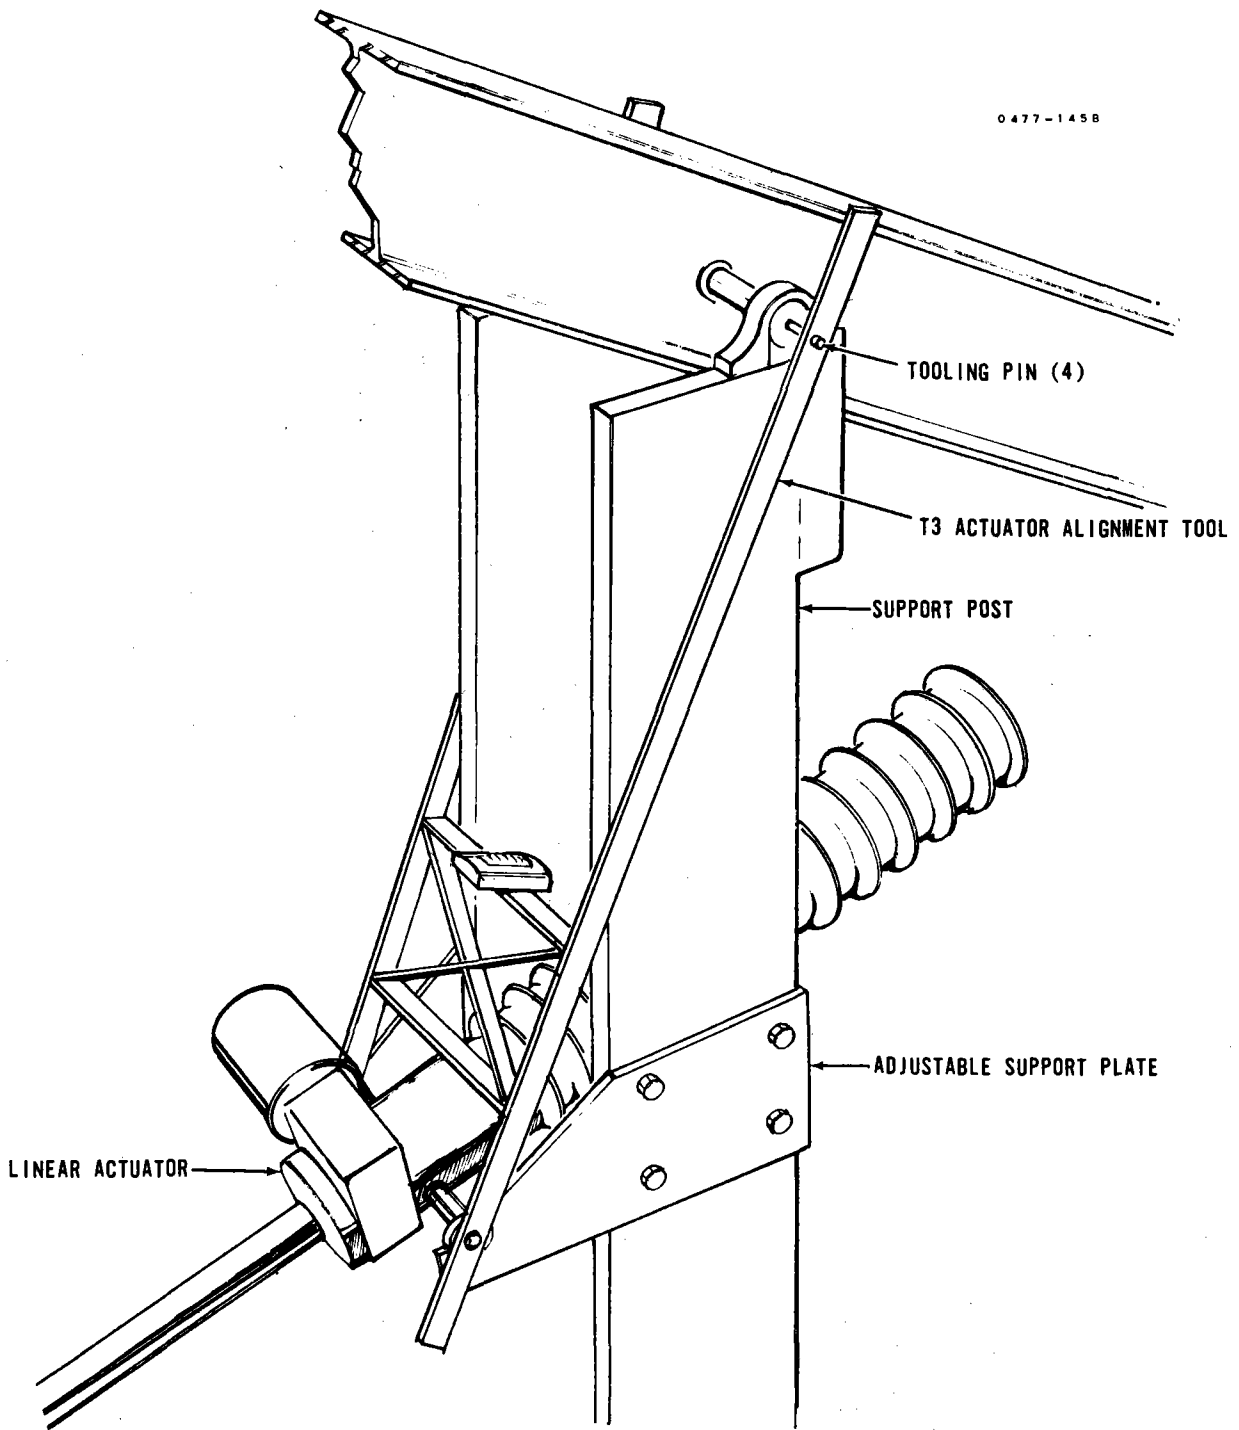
(T3) Actuator Pivot Axis Alignment Tool
